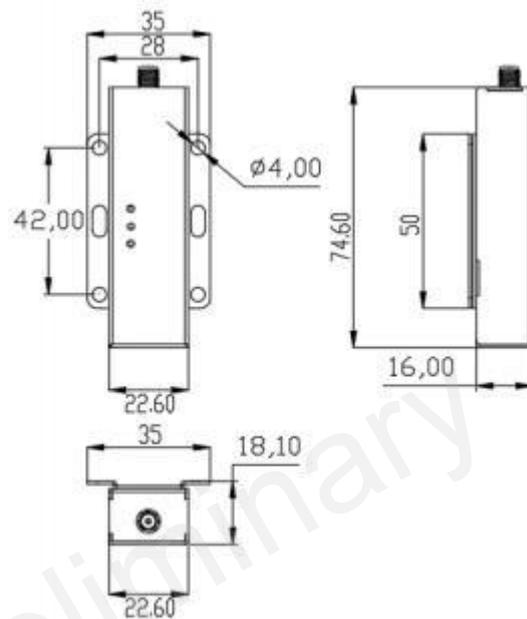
Finished Product Dimensional Drawing Unit: Millimeter (mm)
